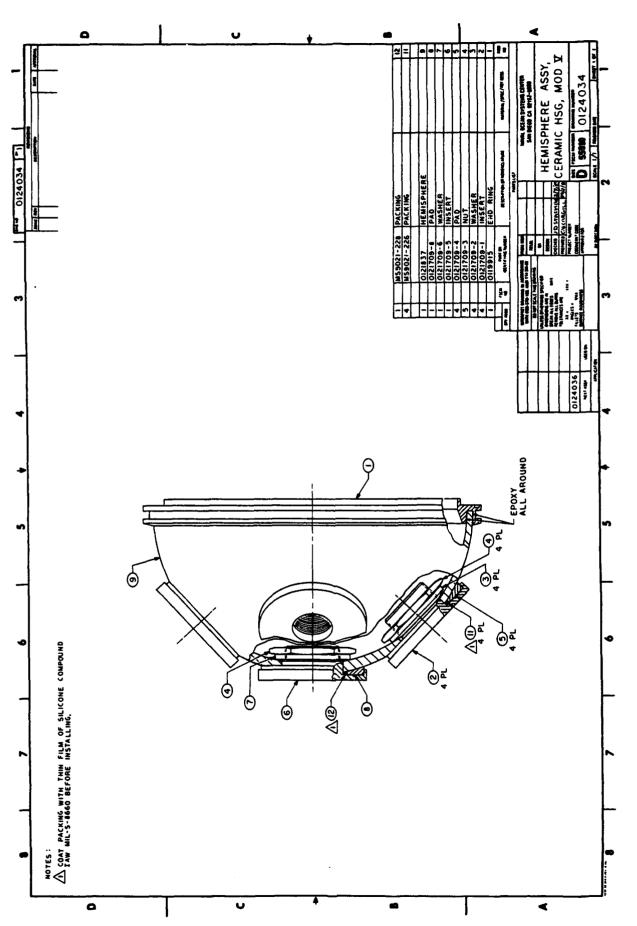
Mod 5 ceramic bulkhead assembly; list of components.
